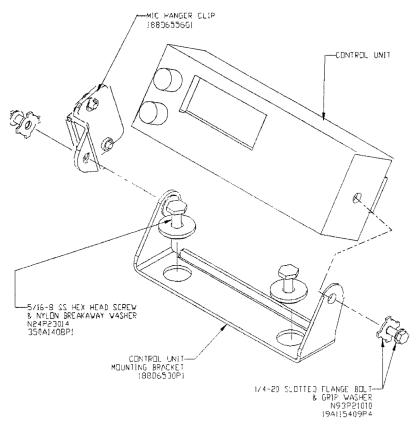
Control Unit Mounting Assembly (188D6804, Sh. 1, Rev. 2)
